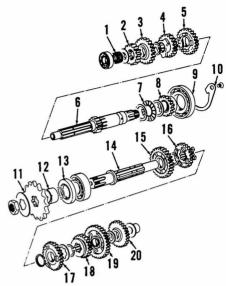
Exploded view of transmission used in TS 90 models.
